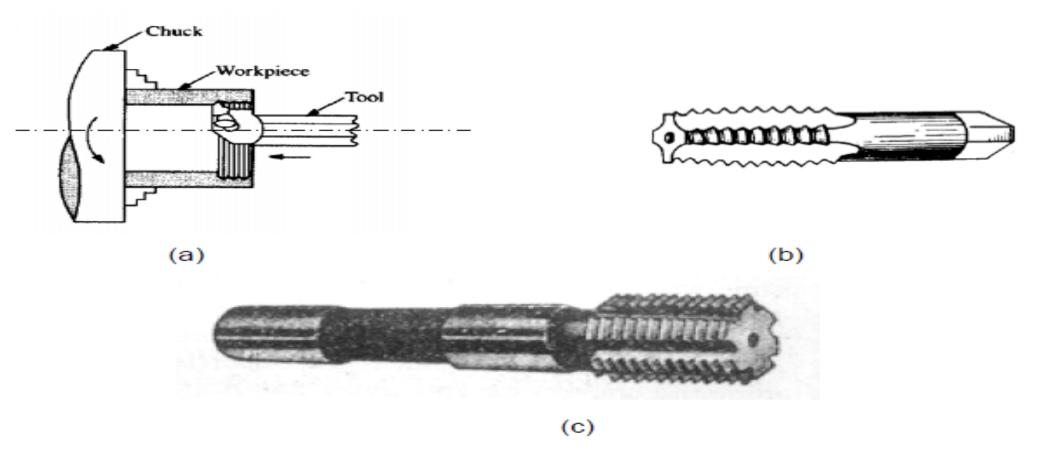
(a) single point tool, (b) solid tap and (c) milling cutter for internal threading in centre lathe.
